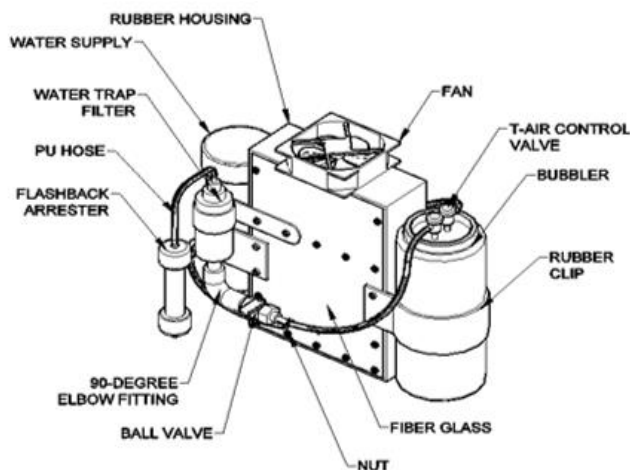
Back perspective view of Motorcycle Fuel Enhancer.
